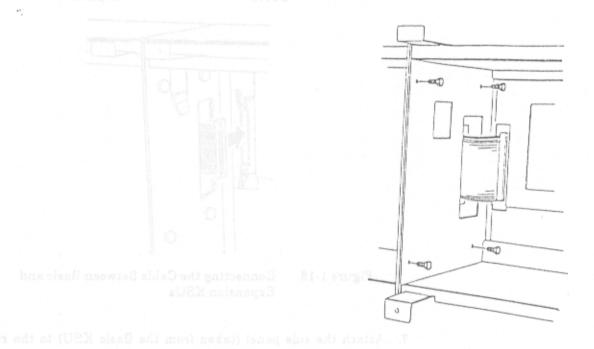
Attaching the Wall Mount Bracket of the Expansion KSU to the Wall
